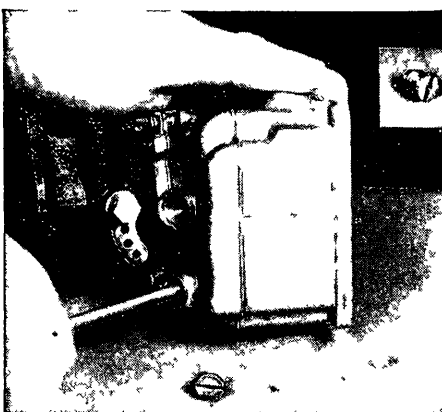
Remove pump inlet check valve plug and valve. Scrap valve. Disassemble main body from throttle body
